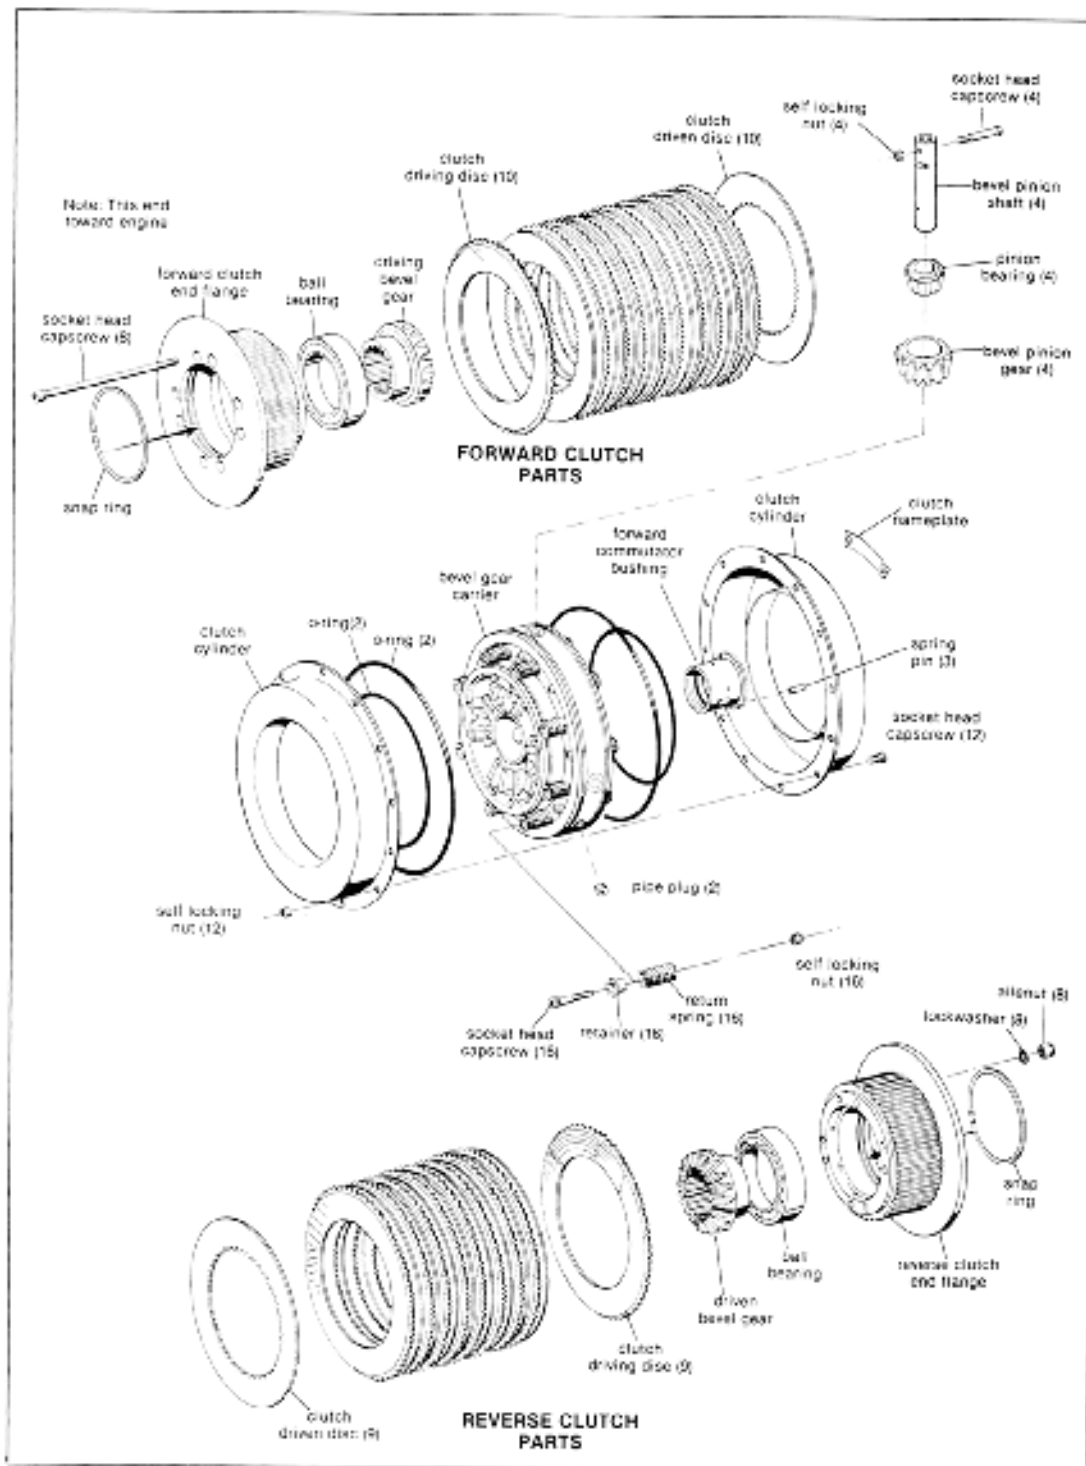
Clutch Assembly (no. 1-00100-2420 is shown).
